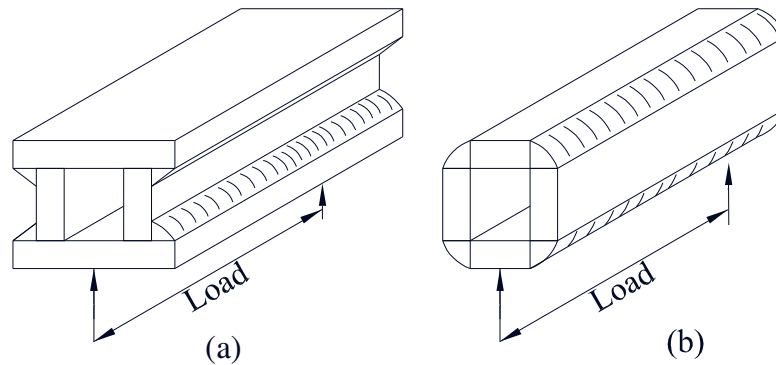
Box beam fabricated in two ways. a. The fillet welds are only in longitudinal shear, of low values. b. The welds sustain both longitudinal and transverse shear. Method (a) is preferred
